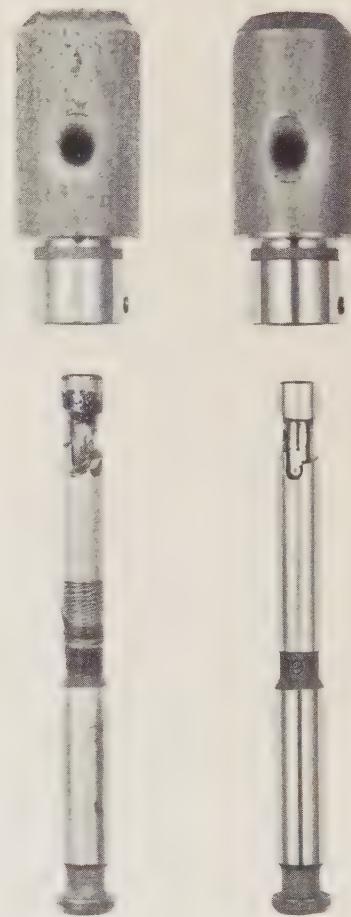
These photographs of the plunger and bushing components of a Diesel engine fuel injector manufactured by Diesel Equipment Division illustrate typical results of ultrasonic cleaning applied to parts having highly finished surfaces. The photograph at the left shows a plunger and bushing contaminated with buffing, lapping, and grinding residues prior to cleaning. The photograph at the right shows the same components after ultrasonic cleaning, rinsing, and drying.
